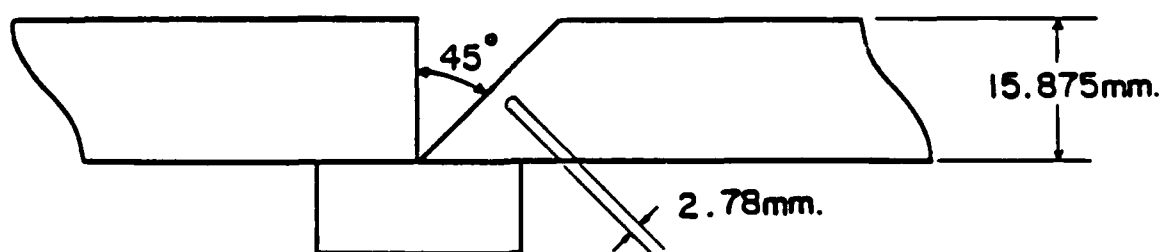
Weld preparation configuration and thermocouple installation.
